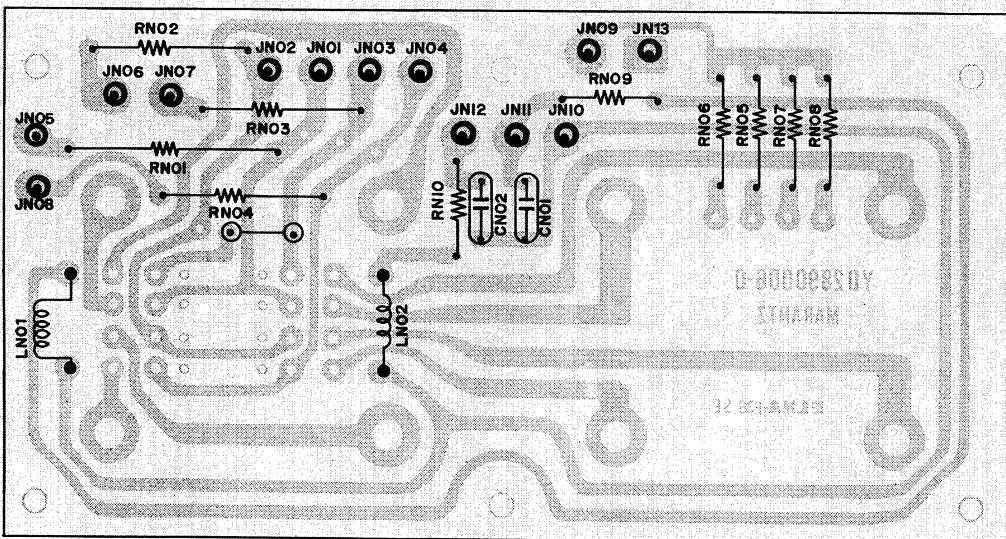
SP Protector Unit Assembly PN01 Component Locations
